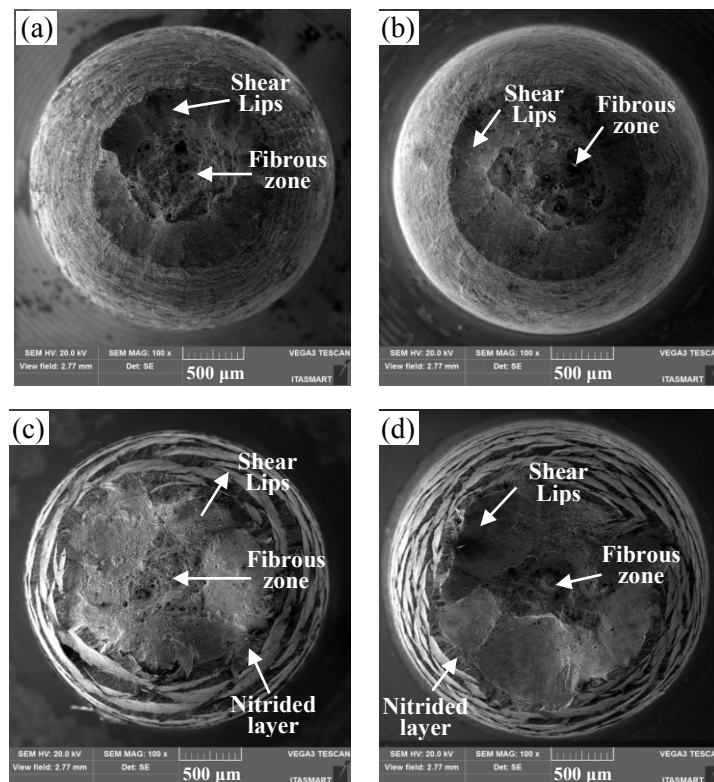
Scanning electron micrograph overview of fracture surface after tensile tests at 600 °C of (a) MAR-S, (b) MAR-SA, (c) MAR-SP and (d) MAR-SAP
